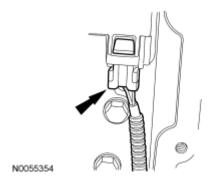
Identifying TR Sensor Electrical Connector Courtesy of FORD MOTOR CO.
